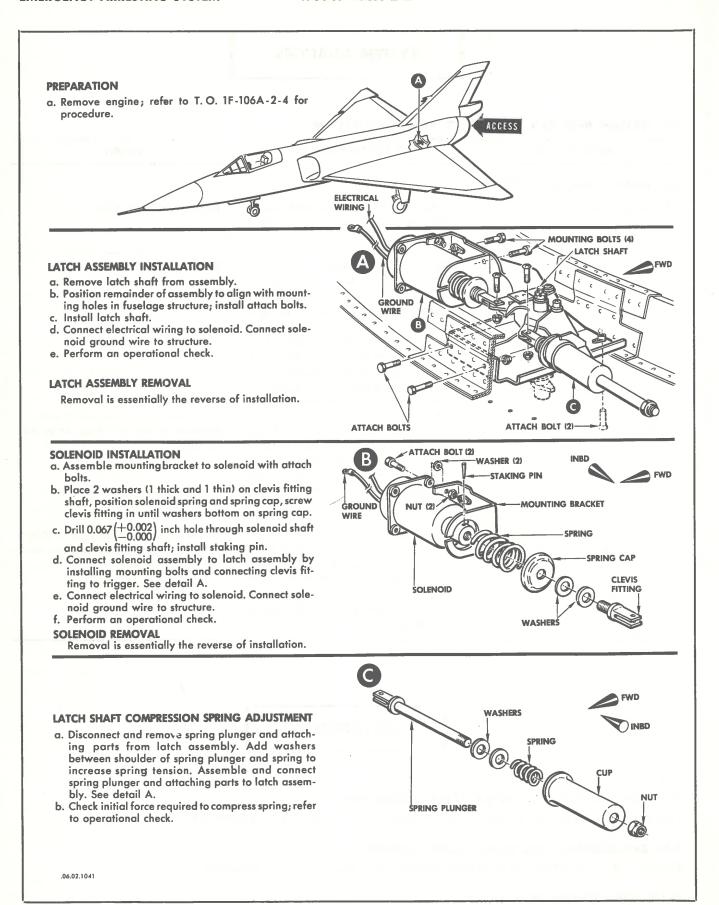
Tail Hook Latch Mechanism, Installation & Adjustment
